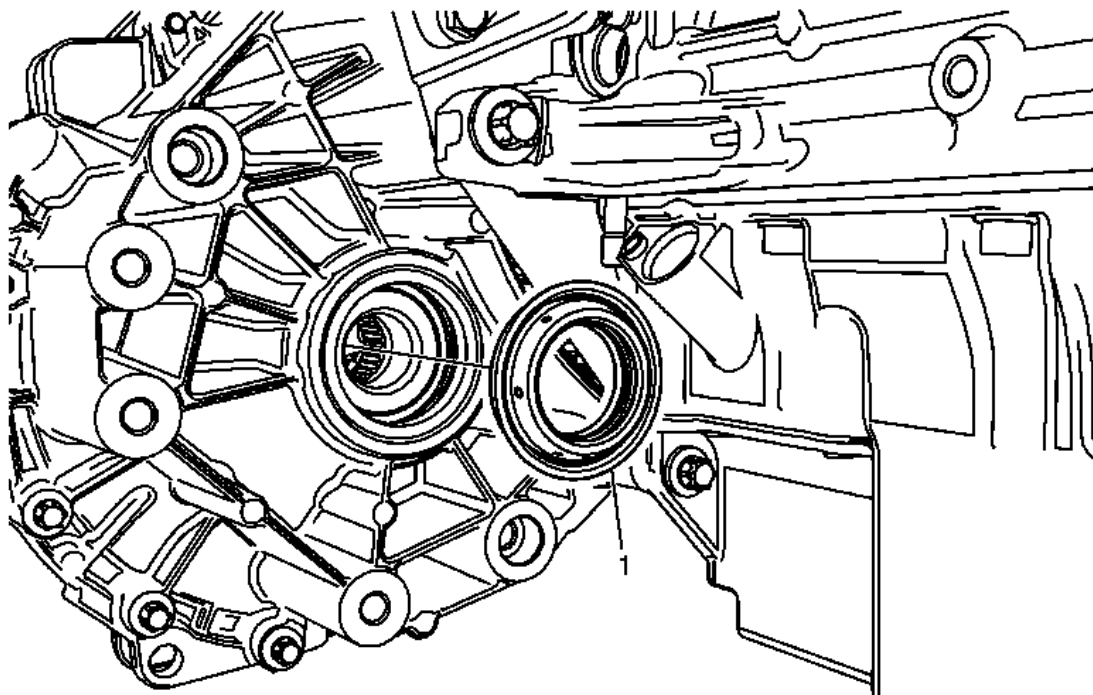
Front Wheel Drive Shaft Seal - Right Side
